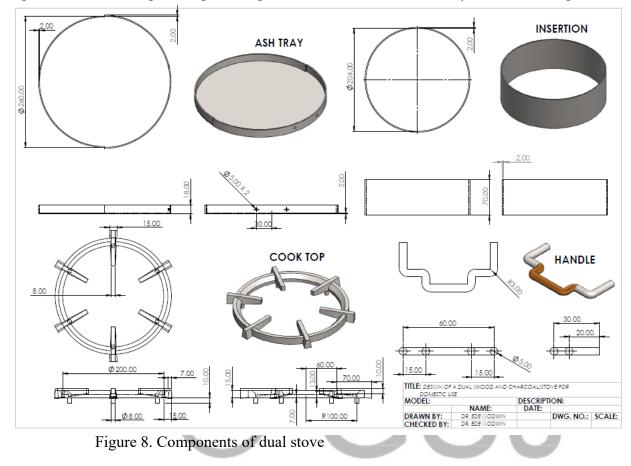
shows the engineering drawing with dimensions of the ash tray, insert, cook top and the handles.
